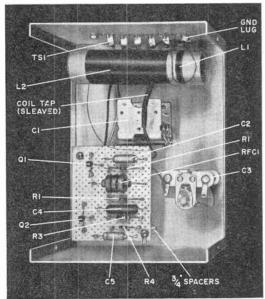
Start construction by drilling holes in the aluminum box to accommodate the tuning dial shaft and regeneration control. Then drill mounting holes for the circuit board and coil form as shown here.
